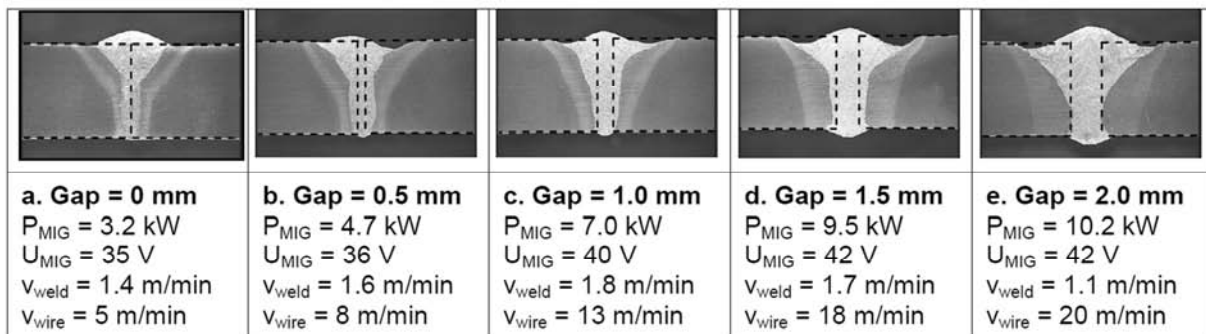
Cross-section of the weld performed with HLAW at different part gaps [11]
